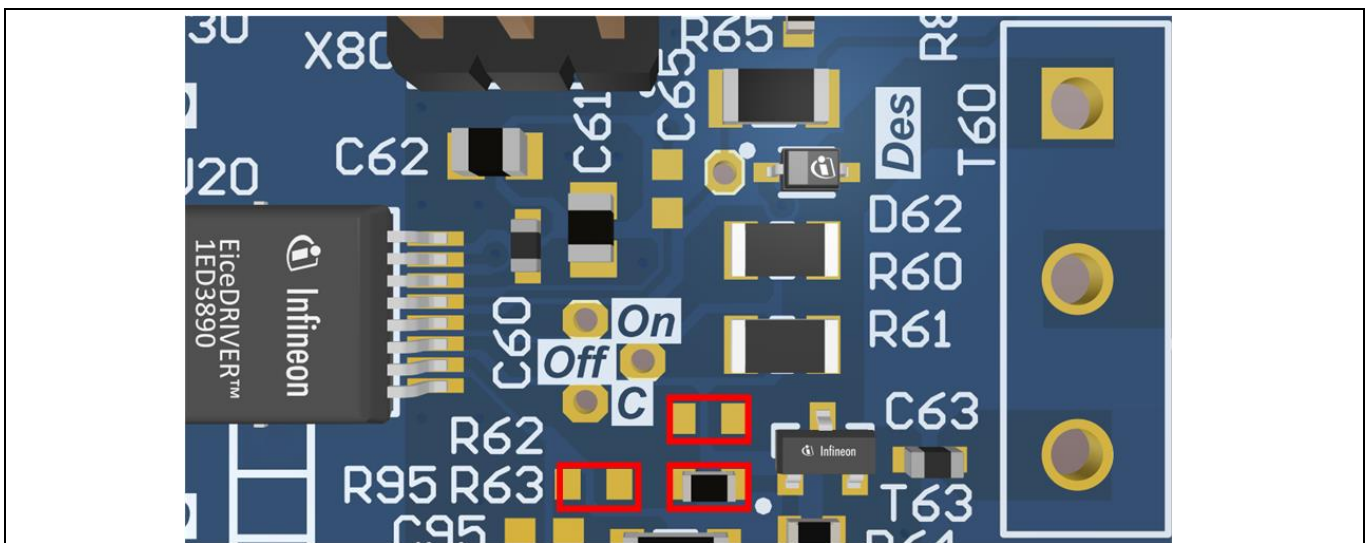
Top-side layout detail with CLAMP configuration resistors marked for high-side gate driver
